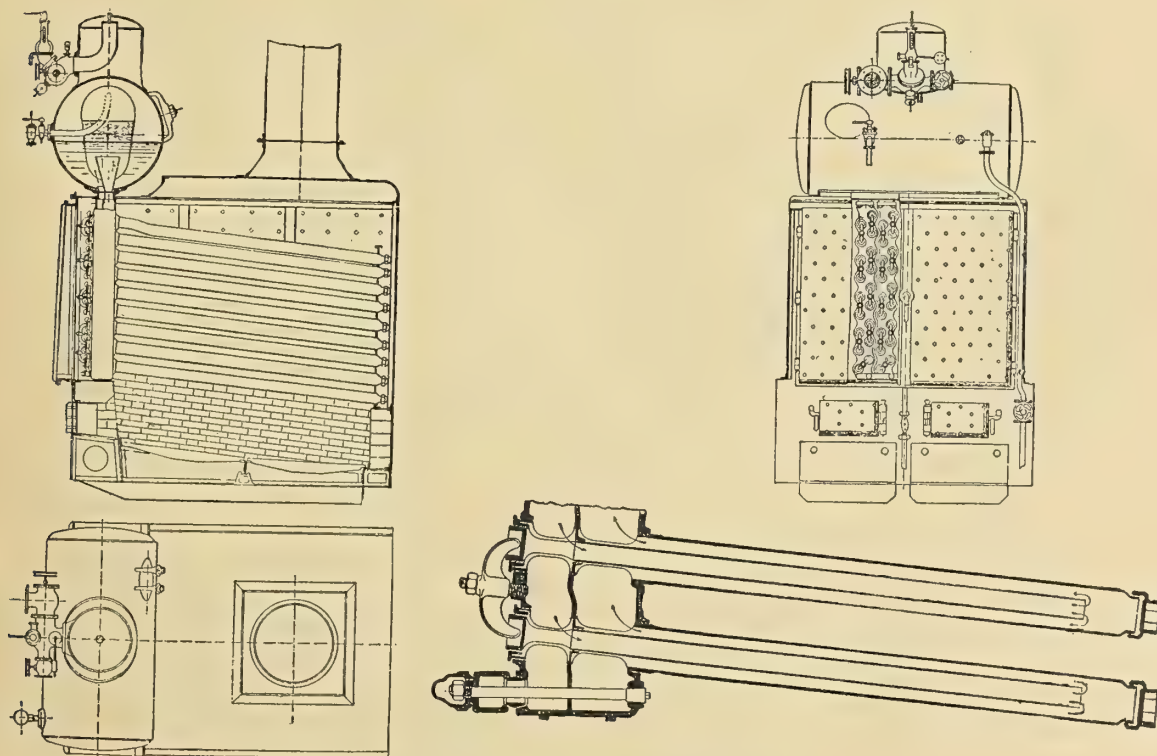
NICLAUSSE WATER-TUBE BOILER.
